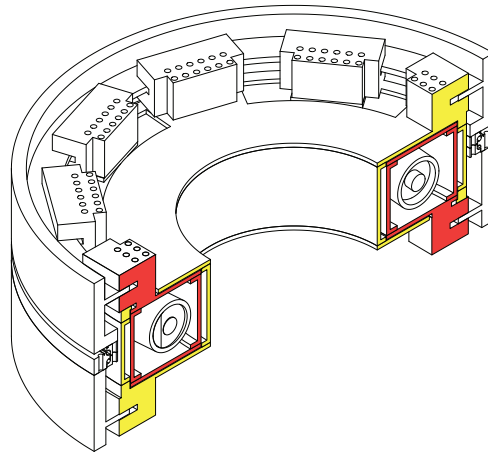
Principal cross-section drawing of the yaw mechanism from an isometric view. Red colour represents inner disc and shows one of the hydraulic brakes connected to it. Yellow colour shows outer disc and a hydraulic brake connected to it.
